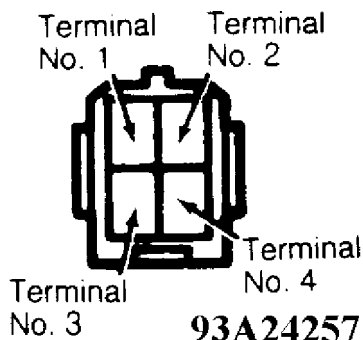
Identifying Overdrive (OD) Switch Terminals
